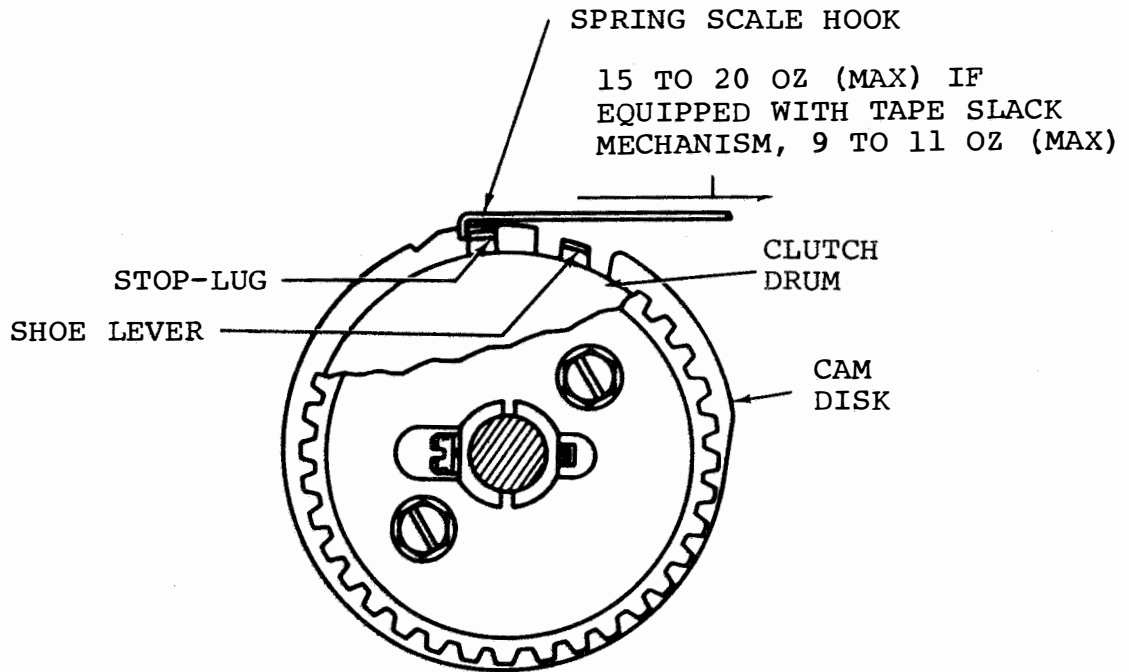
Clutch Shoe Lever Spring and Clutch Shoe Springs, Rear View
